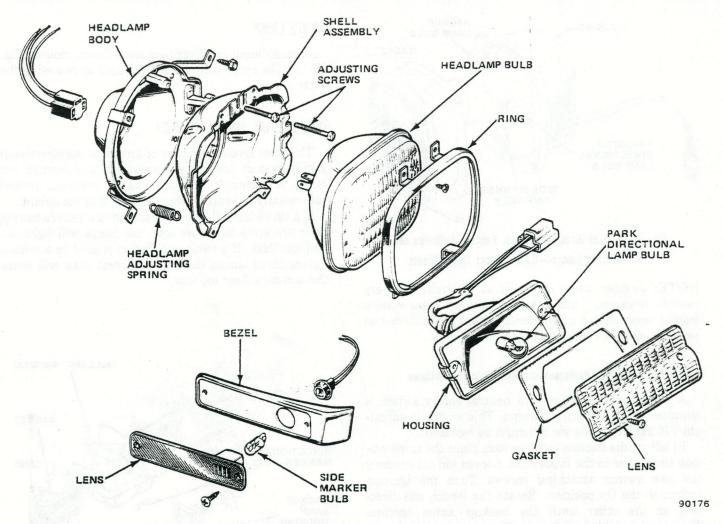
R-6 Headlamp, Parking, Directional and Side Marker Lamps—Cherokee-Wagoneer-Truck Models
